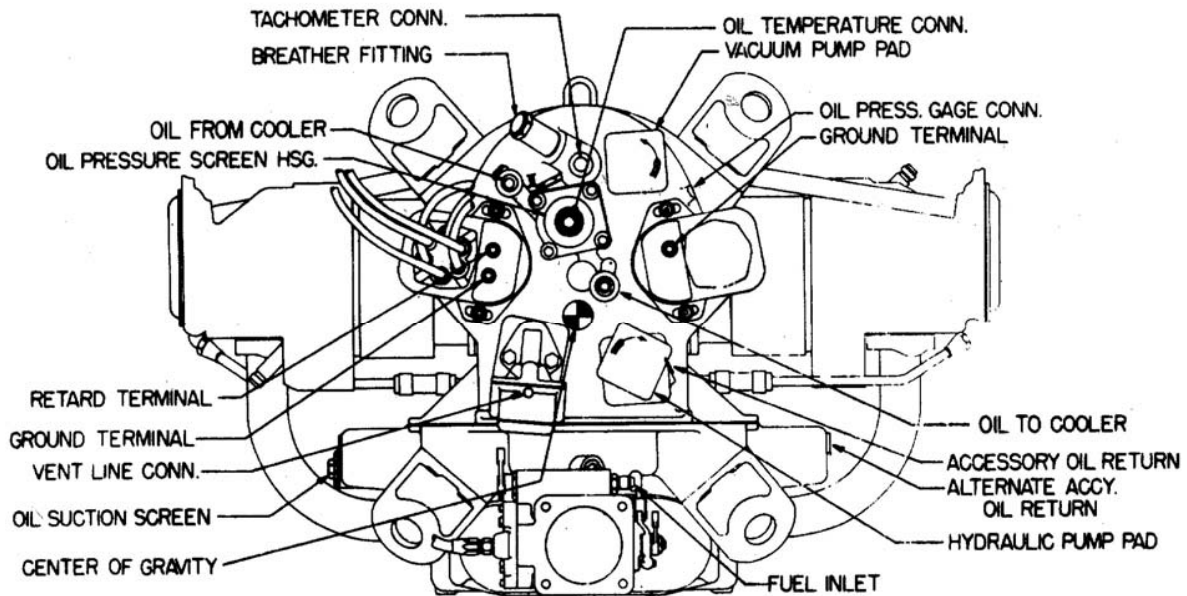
Installation Drawing – Rear View – IO-540-B, -E
